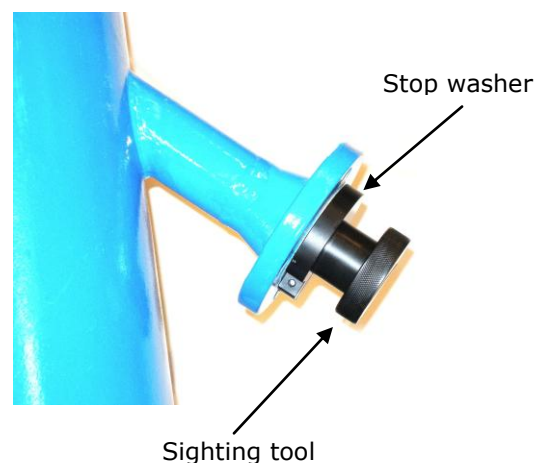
A 42°/48° sighting tool with stop washer mounted in a transducer holder.
